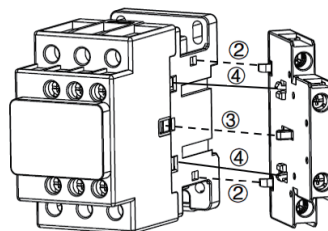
Disassembly method of FC3 side-hung aux. contact
